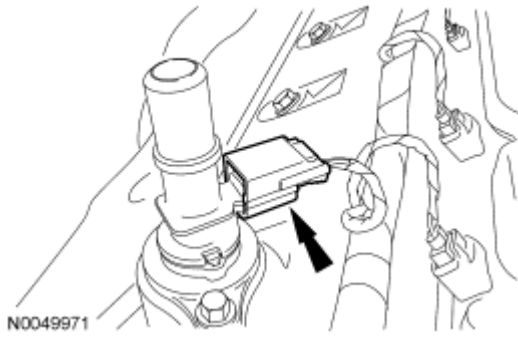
Locating Positive Crankcase Ventilation (PCV) Valve Electrical Connector
